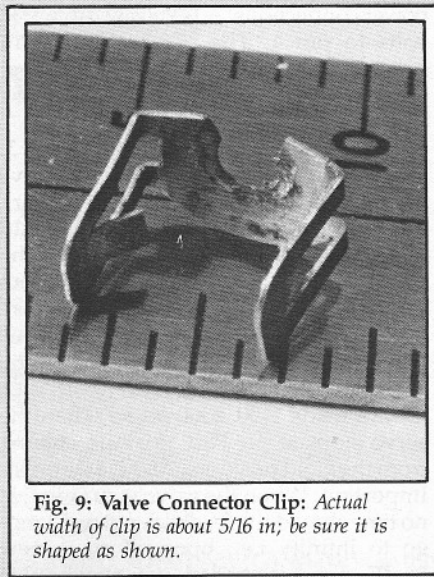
Valve Connector Clip: Actual width of clip is about 5/16 in; be sure it is shaped as shown.
